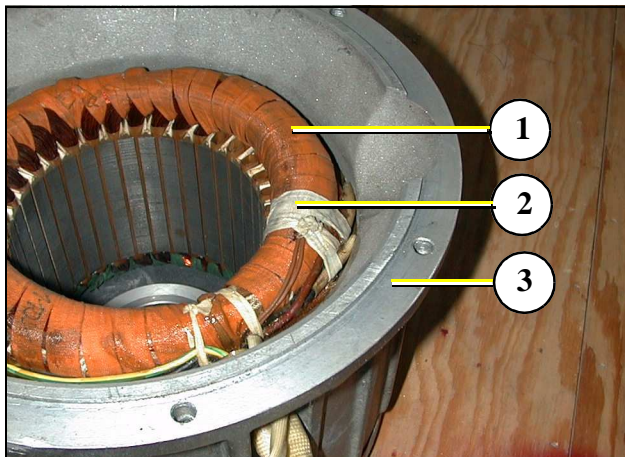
Thermo-switch in the Generator Winding
